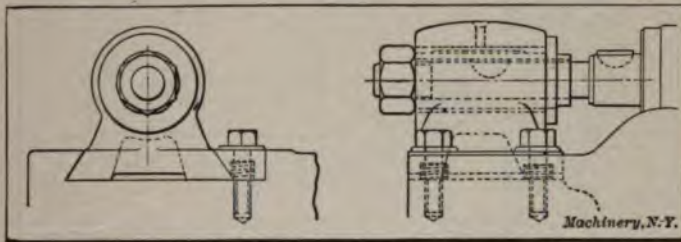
Clamping Strip with Springs for Raising the Strip when Released
